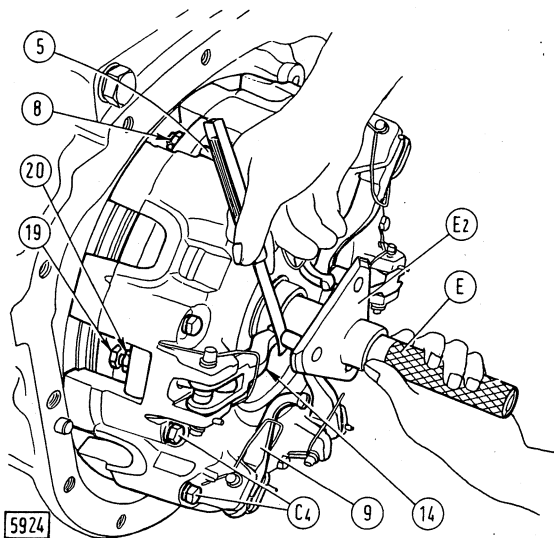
Adjusting complanarity of the release levers with the 11" LUK or O.M.G. clutch installed on engine flywheel.
